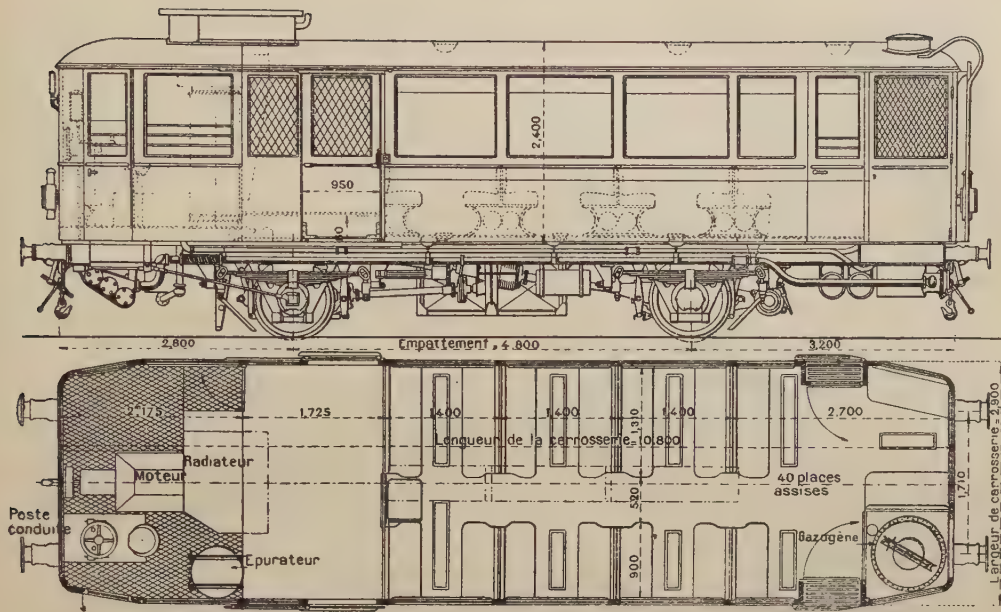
Rail car driven by 94-H. P. explosion motor fed by Renault gas producer.
